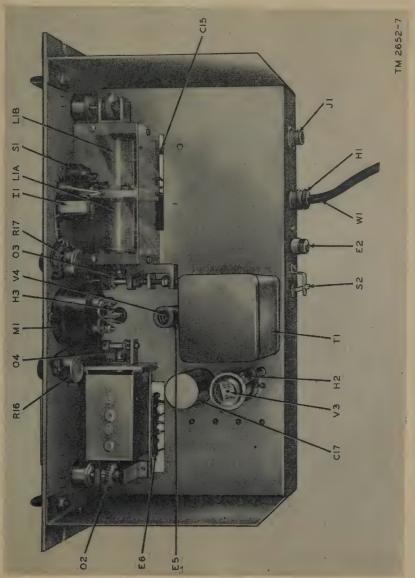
Panel and chassis assembly, top view, dust cover removed.
